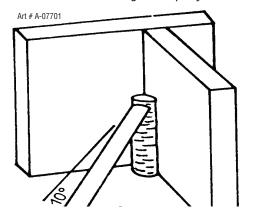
Single Run Vertical Fillet Weld
